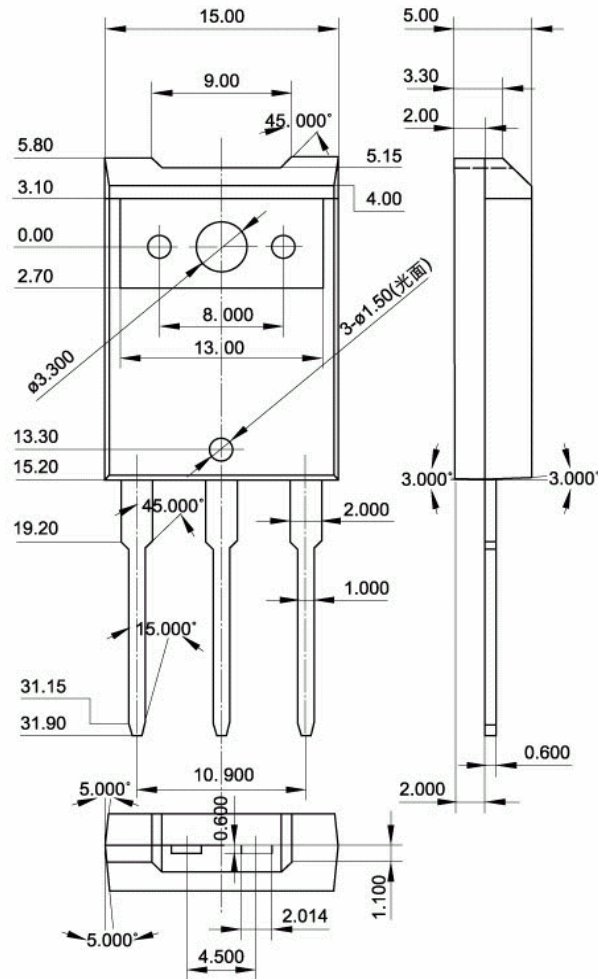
Outline dimensions (unindicated tolerance:±0.30mm)
